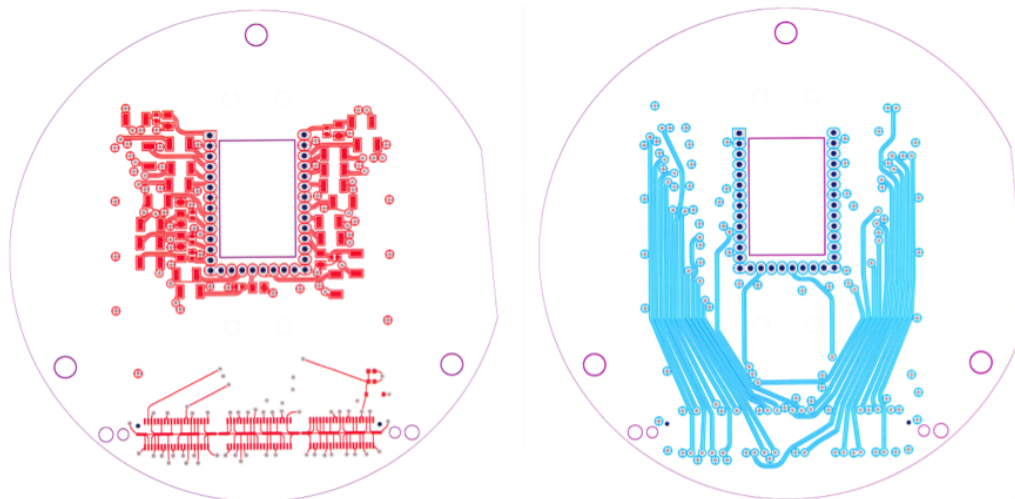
Flight PCB drawings with purple board cut-outs for the EMCCD at the center of the board and several screw clearances. Left: the top layer copper traces are shown in red. The electrical components can be seen as well, resistors and capacitors close to EMCCD pin sockets and the EQCD connector at the bottom of the board. Right: the middle layer copper traces are shown in blue. All signals are fed through the center of the board for noise isolation. This board has four layers, two of which are copper planes above and below the center signal traces for shielding.
